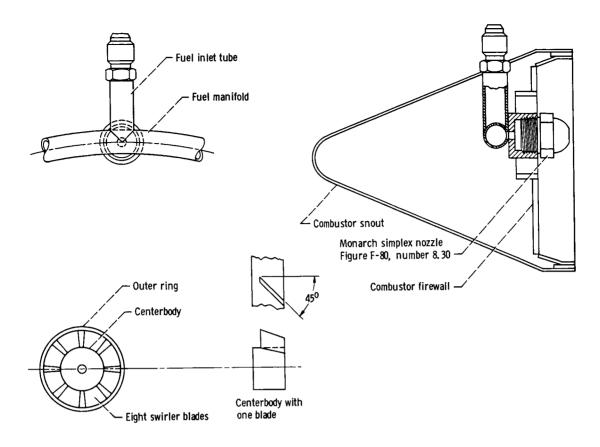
Simplex nozzle combustor fuel manifold, nozzle, and swirler.
